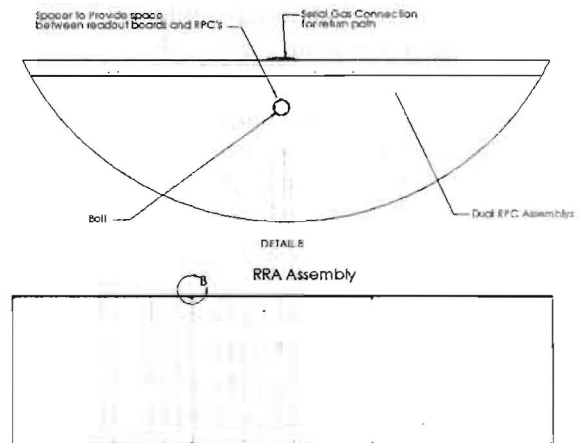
Assembly of three RPC chambers bolted to the readout boards.
